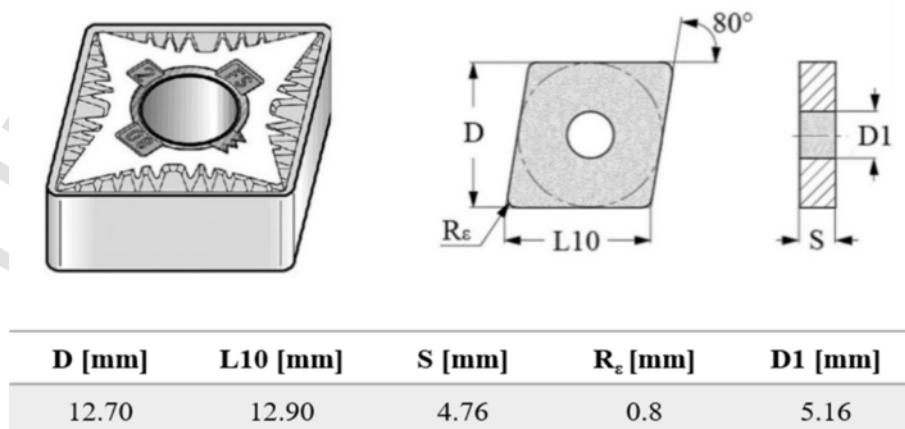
Geometry of the tools ISO CNGG120408FS.
